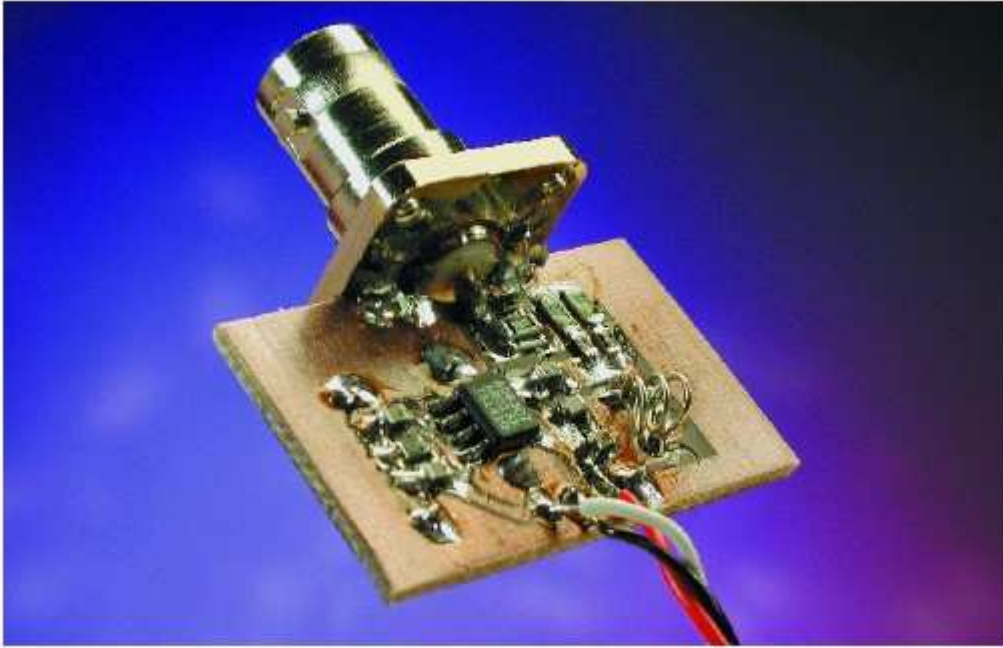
Input board with BNC flange socket attached by soldering along the edge.
